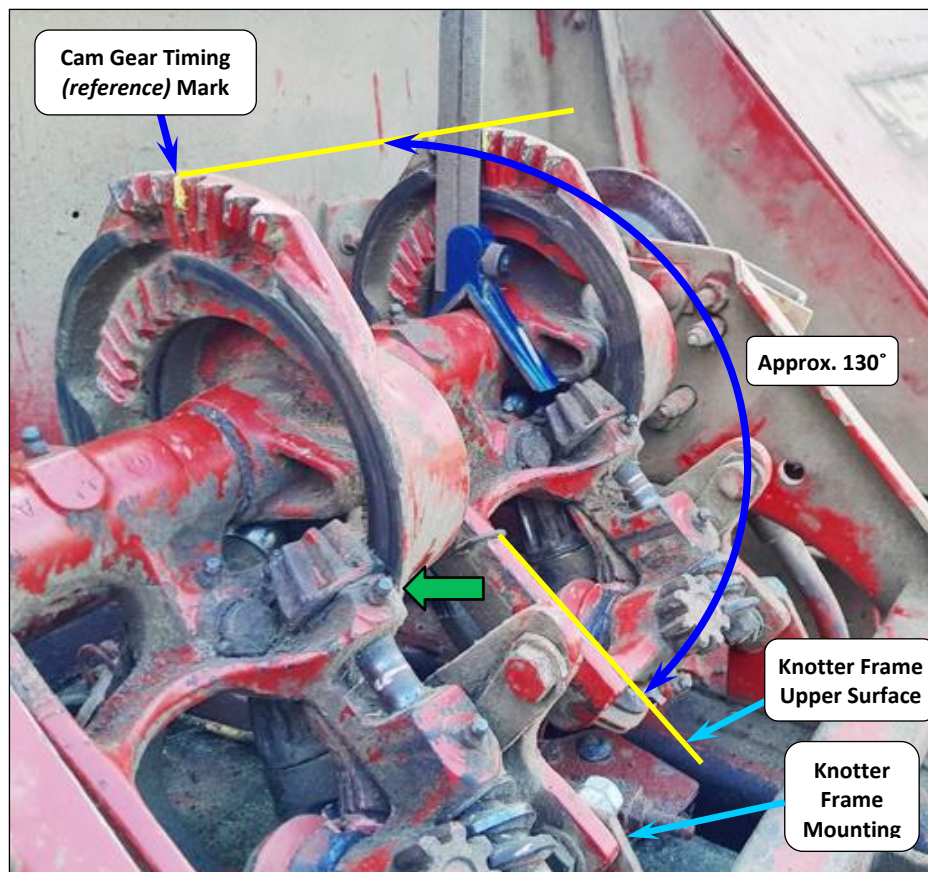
(New Holland) baler cam gear angular position relative to the knotter frames when 'at-rest'
